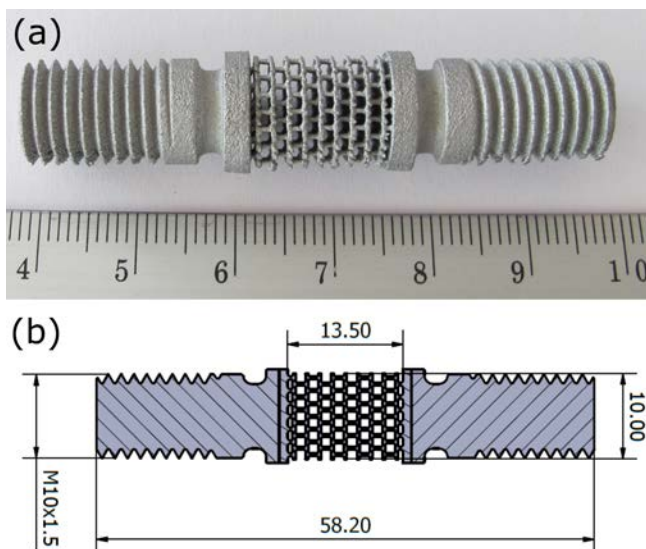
Example of specimen with the threaded heads for push-pull fatigue tests: (a) printed Ti alloy specimen; (b) longitudinal section of the CAD model (annotations in *mm*) The diameter of the cellular part is 10 mm for the cubic structures and 12 mm for the cylindrical ones.
